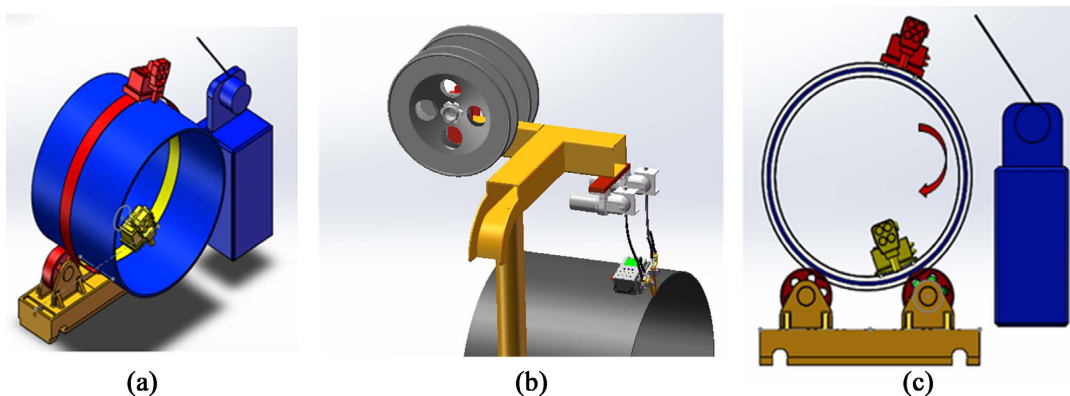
Schematic diagram of SAW welding process. (a) Internal SAW; (b) External SAW; (c) Rotation of the steel pipe
